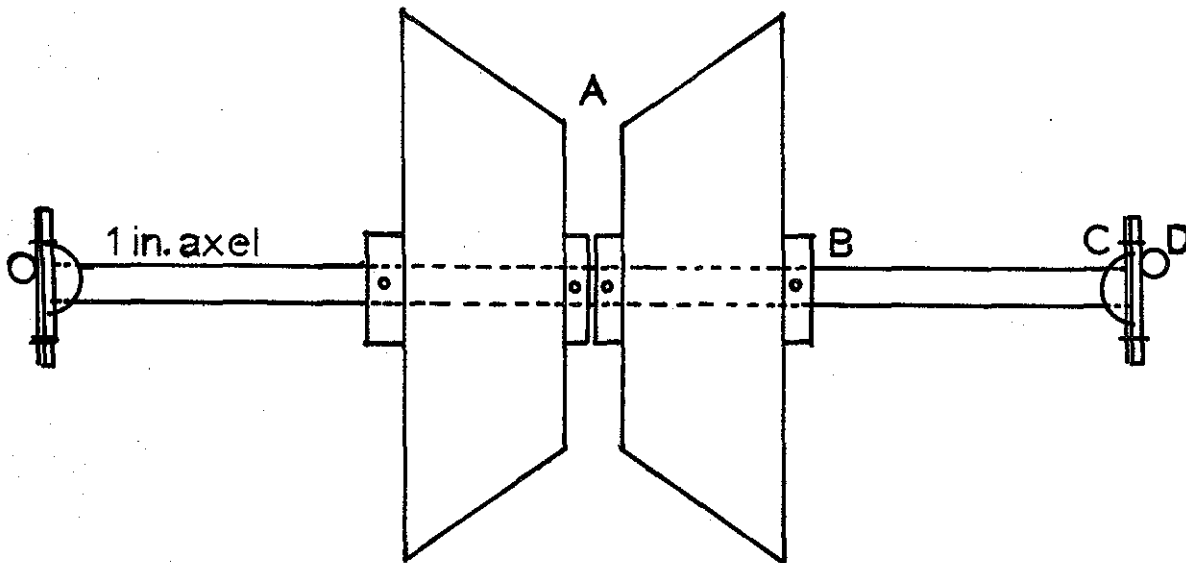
Arrangements of the parts of a WSU press wheel assembly.
